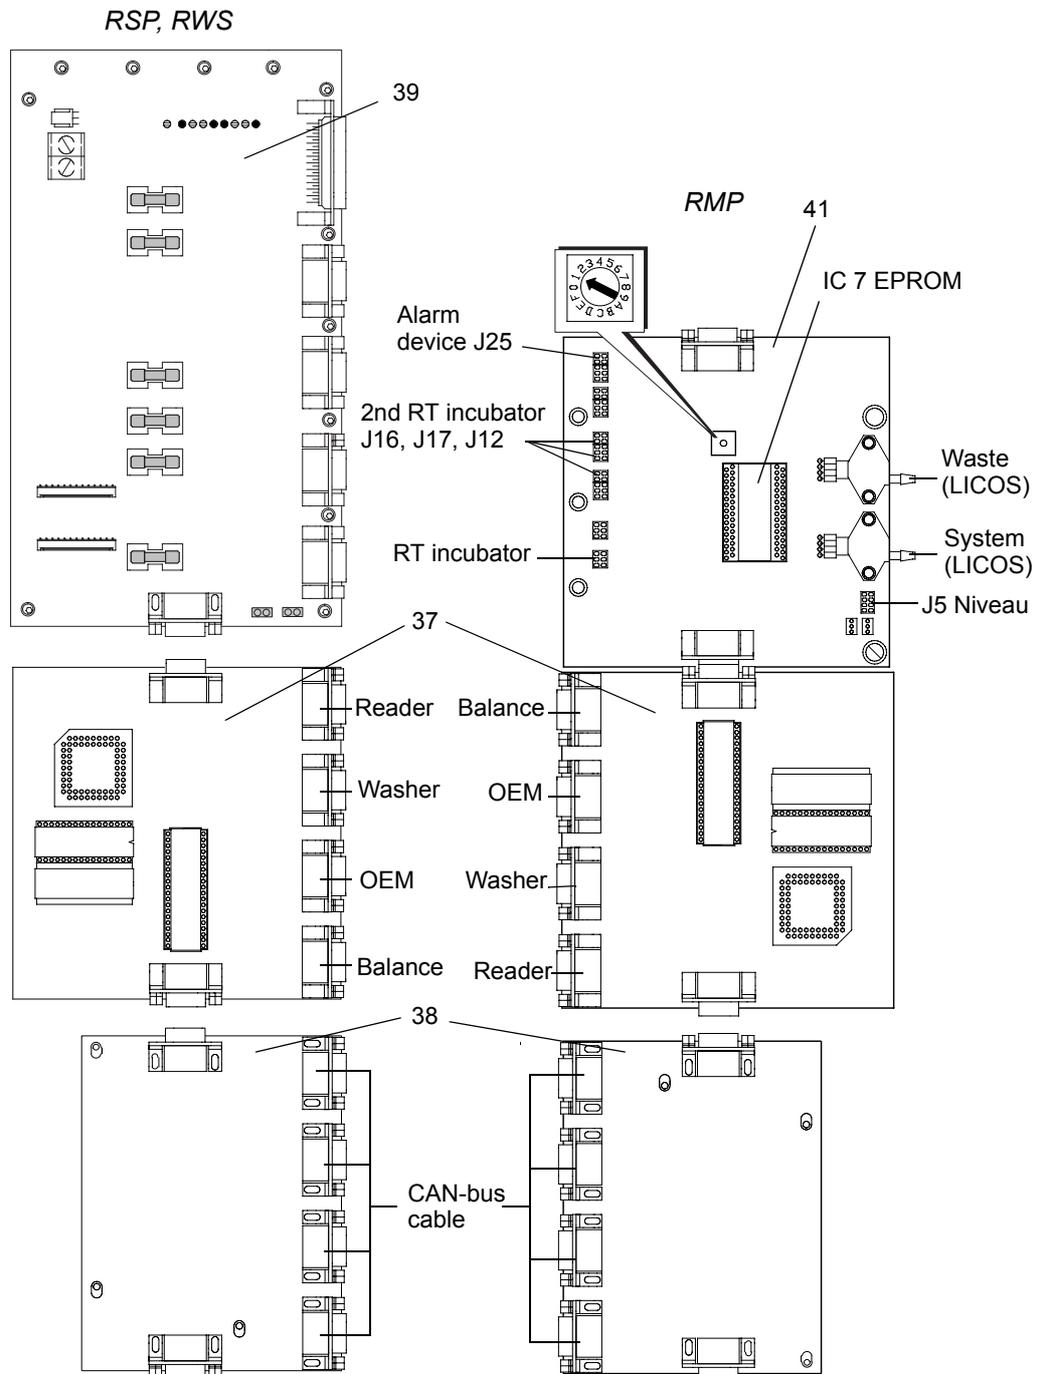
Cable connections on Supervisor, Uniport and CANDI boards
